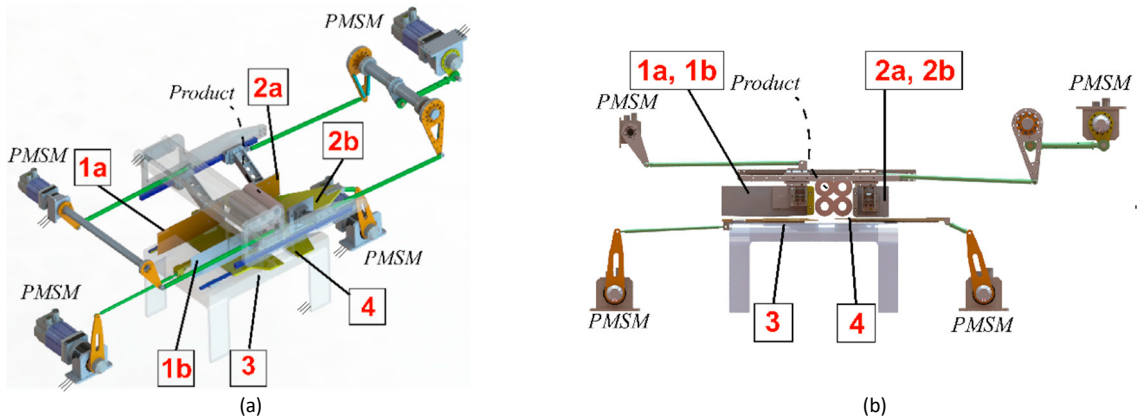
CAD drawings representing the actual machine design: (a) 3D view and (b) lateral view.
